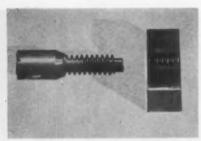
Copper electrode and mold set for worm gear of toy train, which was cut with the electrode. Same electrode is used to cut matching half of the mold, insuring congruity of the mold edges on the parting line.
